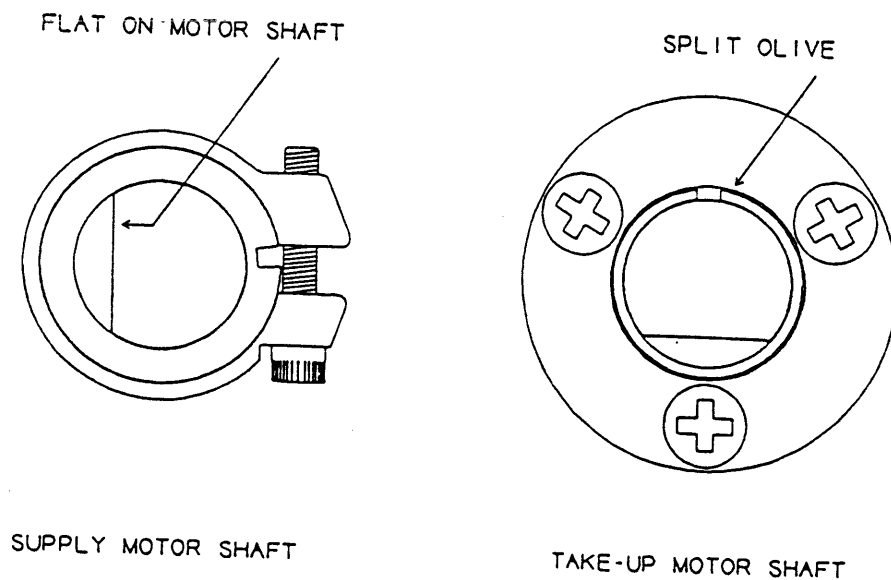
ORIENTATION OF MOTOR SHAFT
